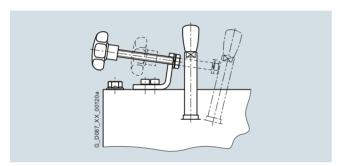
/43 Example of manual brake release lever with locking mechanism for brake L
